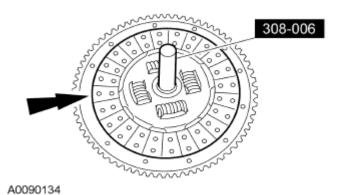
Locating Clutch Disk Aligner And Clutch Disc Courtesy of FORD MOTOR CO.
